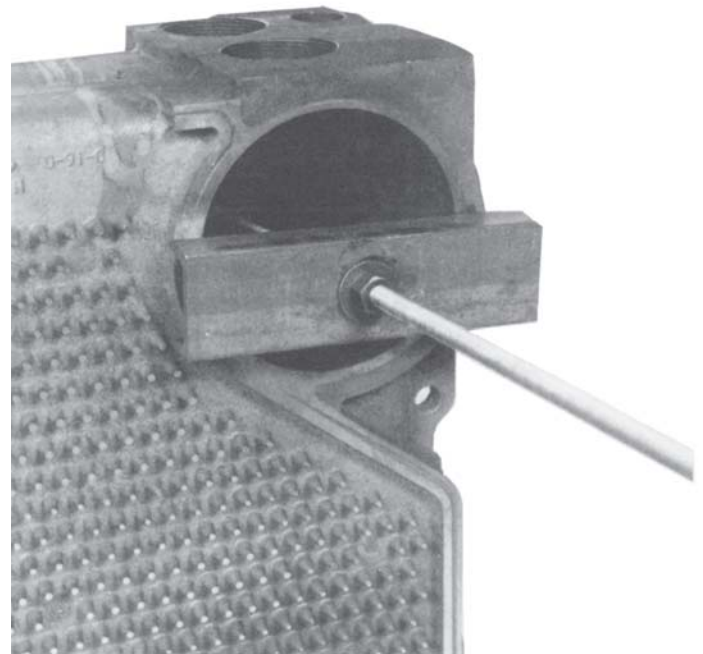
Center Section Channel Block Position (Partial Block Draw-Up)
